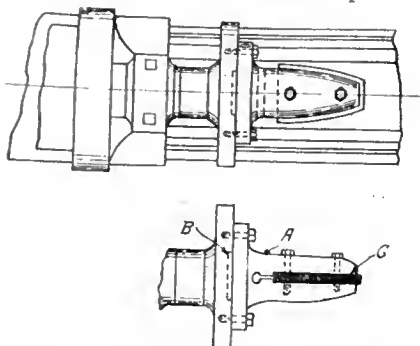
TURNING JIG FOR LARGE SHELL CUTTERS.
